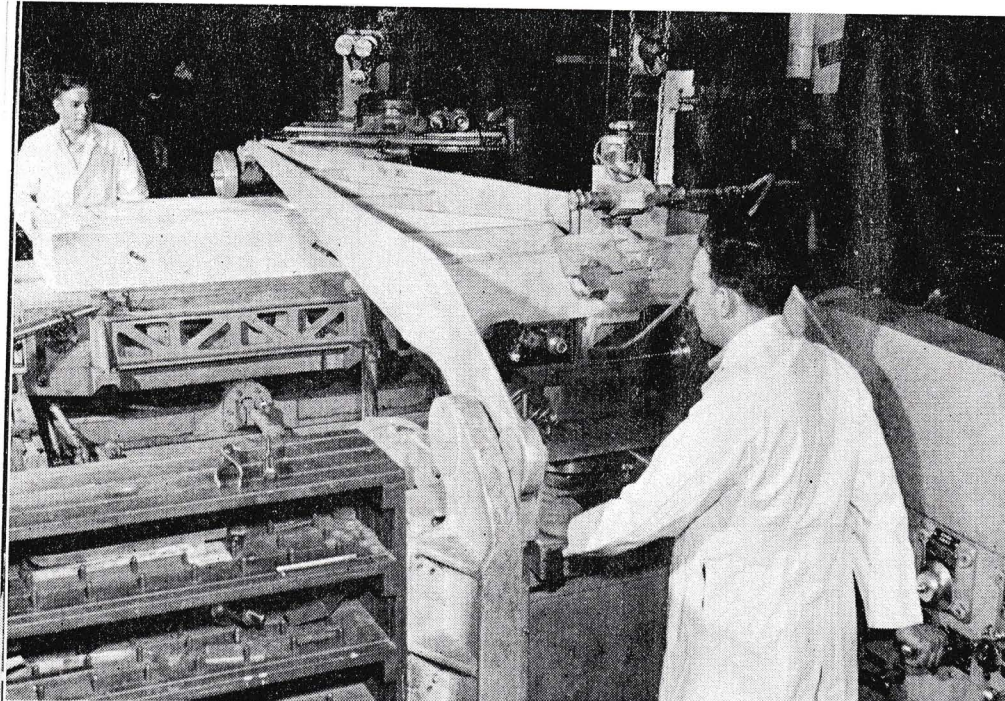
Pantograph duplicating machine (Avro Canada patented design) for grinding cavities in blade forging dies.
